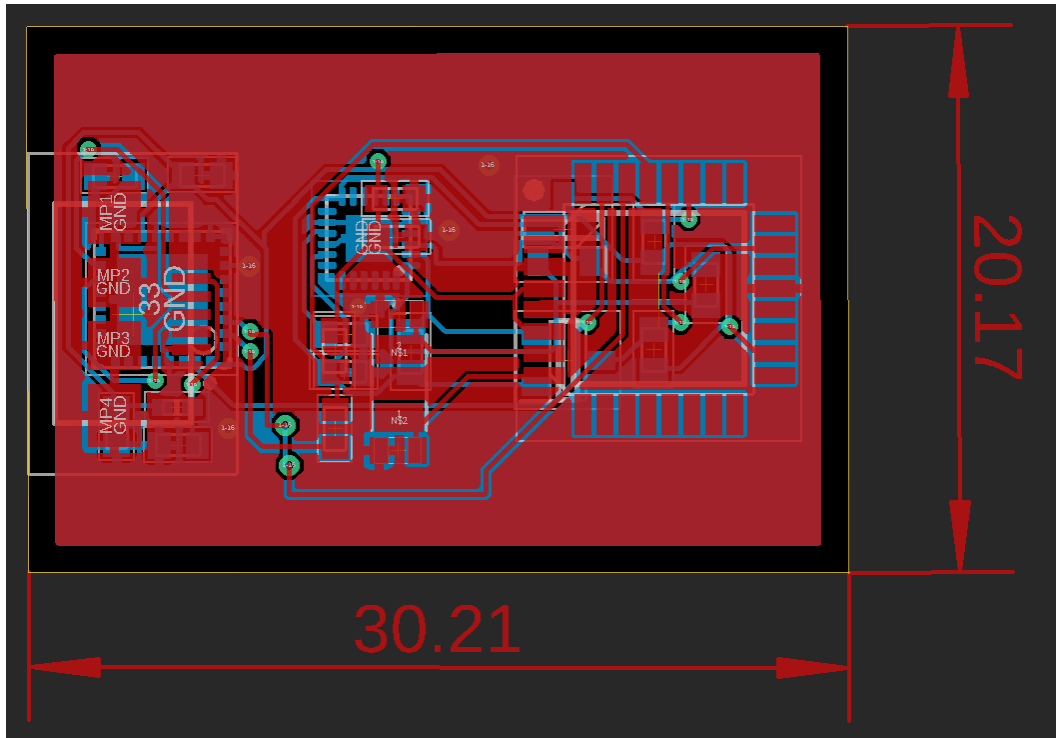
Illustrating traces and components on bottom of the sensor card, for the second design of the PCB
